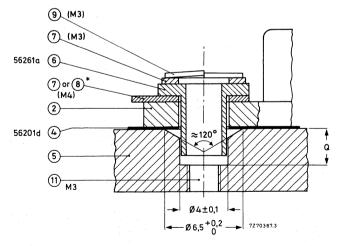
Assembly (partial) for Fig. 10 - tapped holes. Q minimum 2,5 mm.
